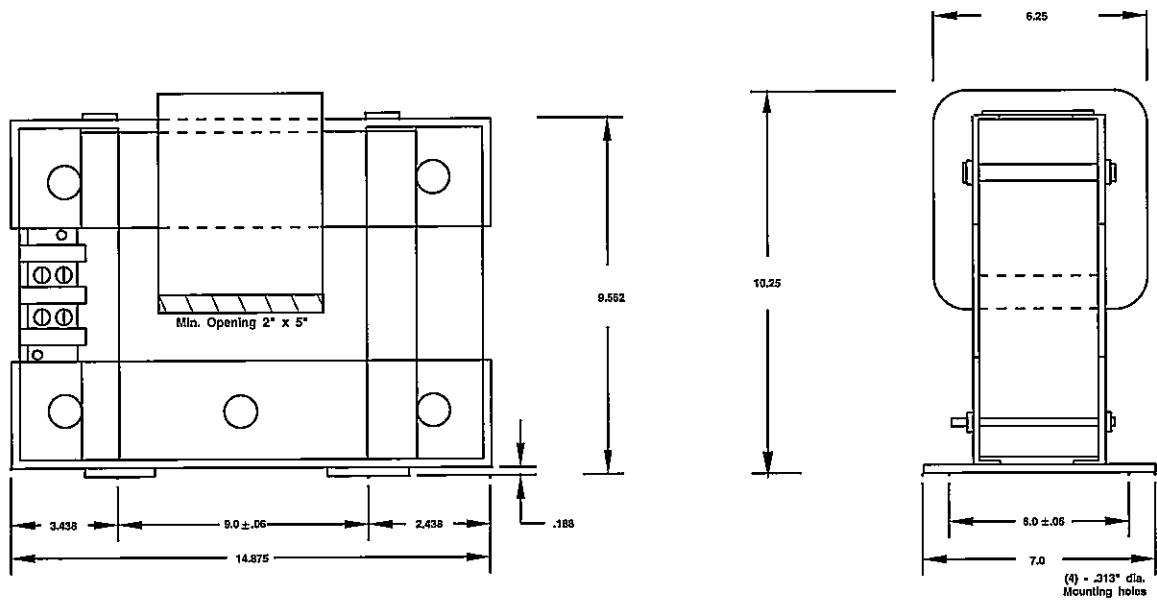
OUTLINE DRAWING BE 25928-001.
